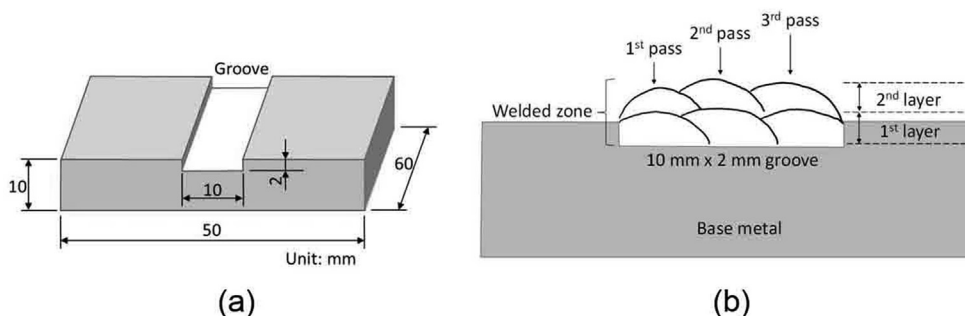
(a) Sample dimension and (b) the schematic diagram of welding procedures.
